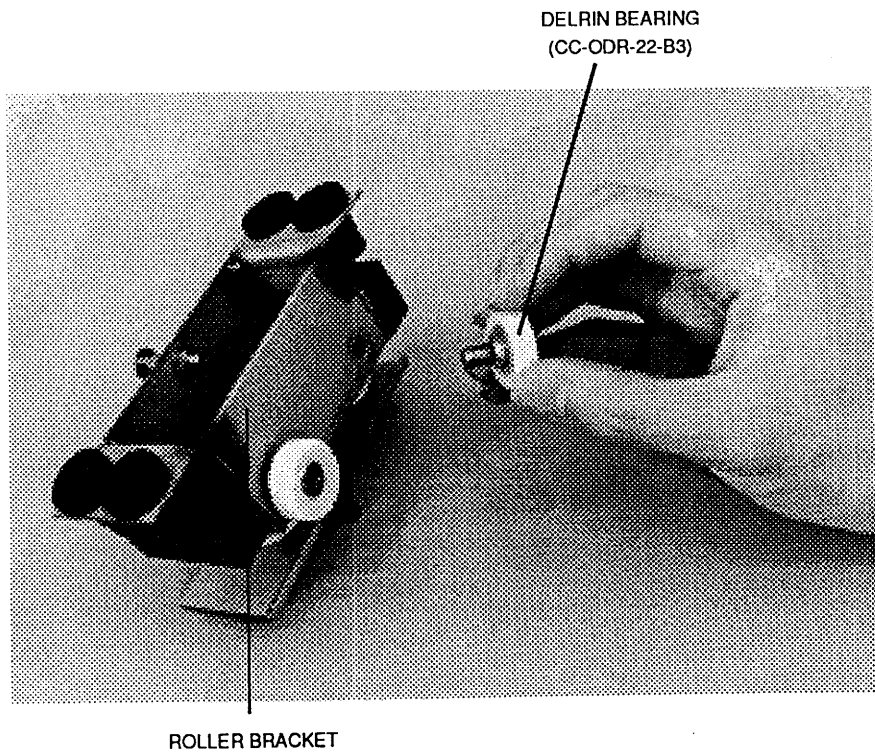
, DELRIN BEARING/ROLLER BRACKET
